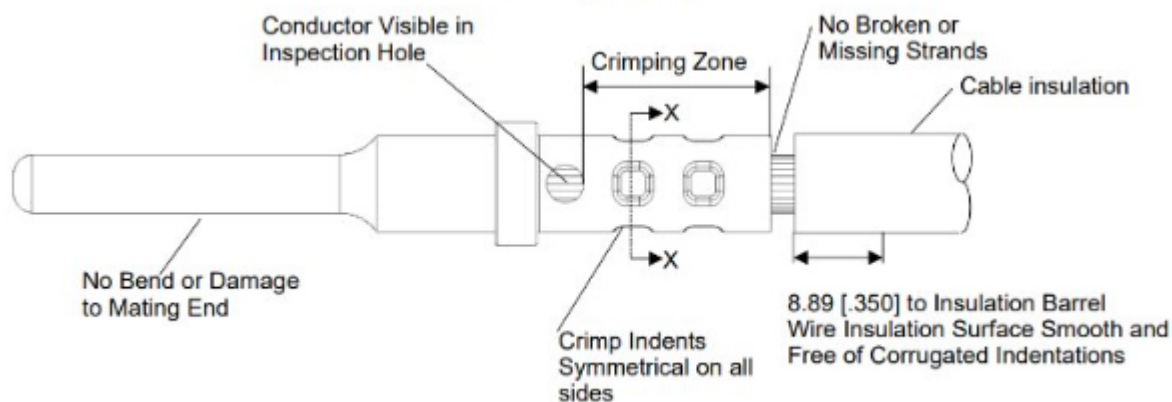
Example of Good Wire Crimp - Solid Terminal Connectors
